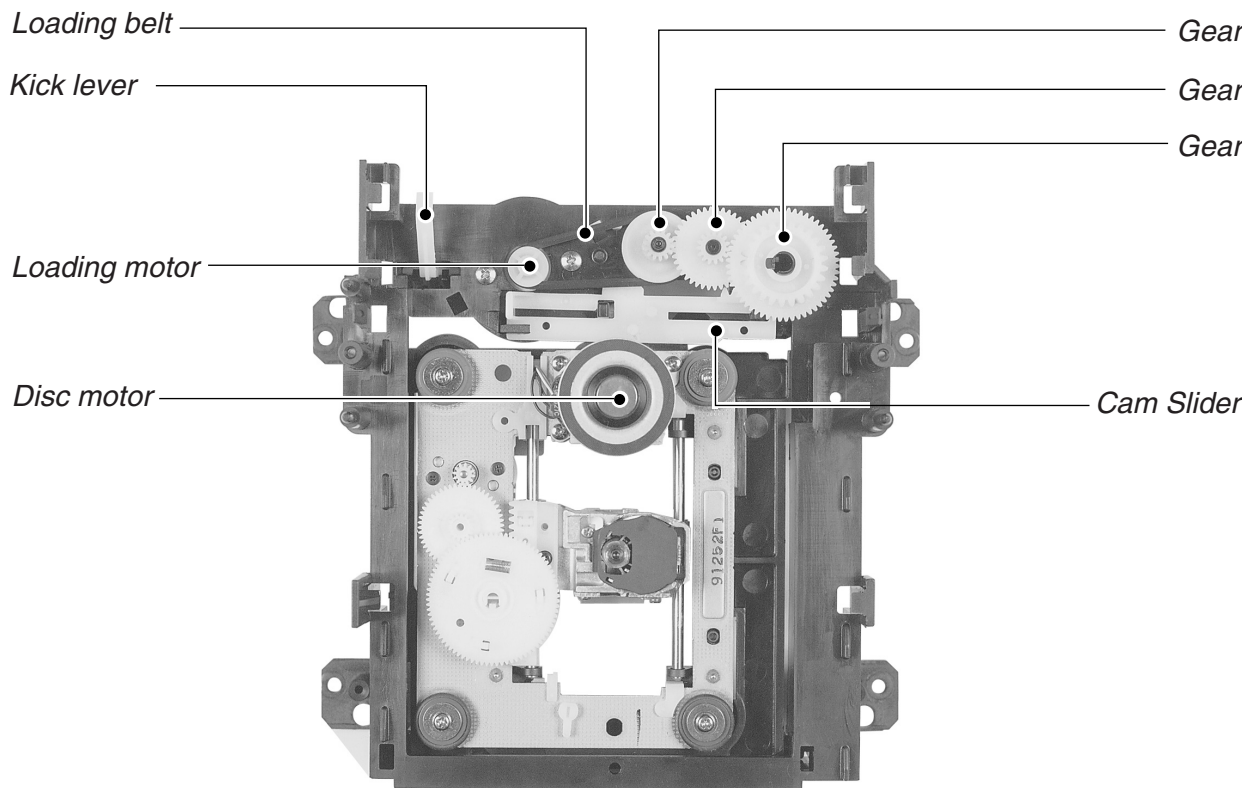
Mechanism chassis assembly (Internal side)
